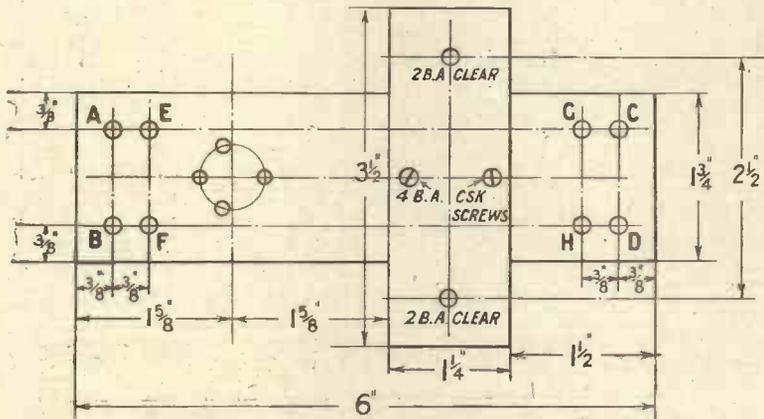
Layout and dimensions of the ebonite cross-pieces.
